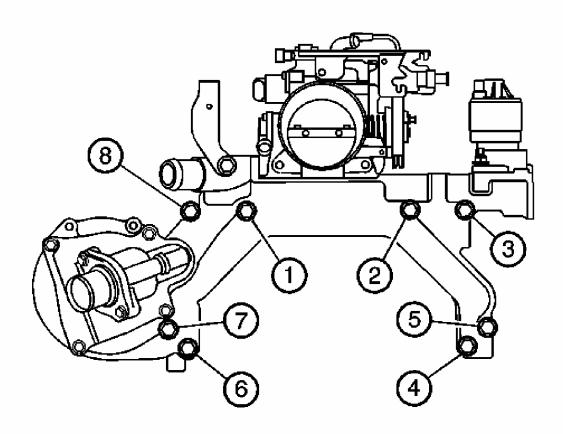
View of Water Crossover Bolts Courtesy of GENERAL MOTORS CORP.
